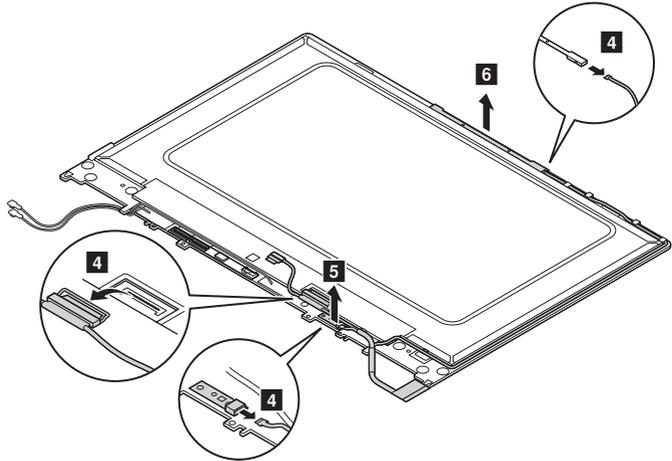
Removal steps of MIC board, sensor board, camera and EDP cable
